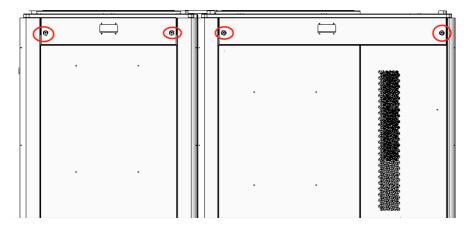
Schematic diagram of disassembling the screws of the rotating cover plate
